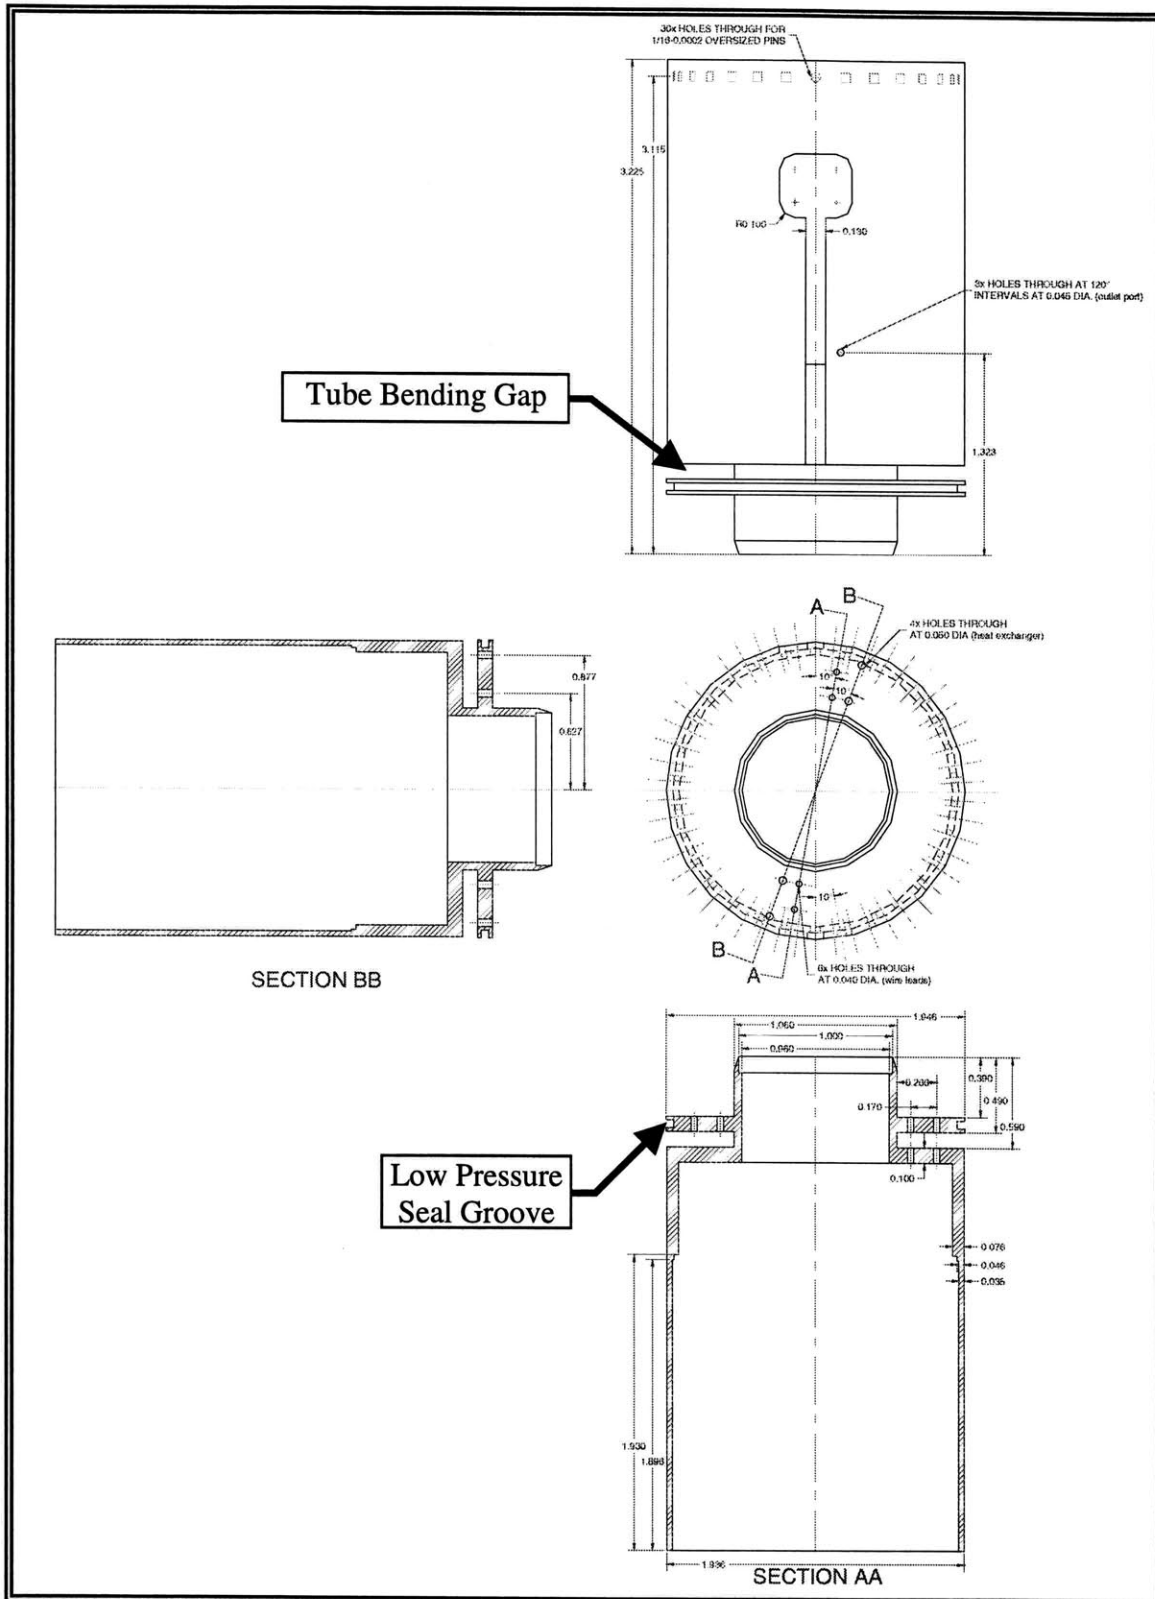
The housing wall has a very complex geometry with many holes and ports because it interacts with all other parts making up the cold end
